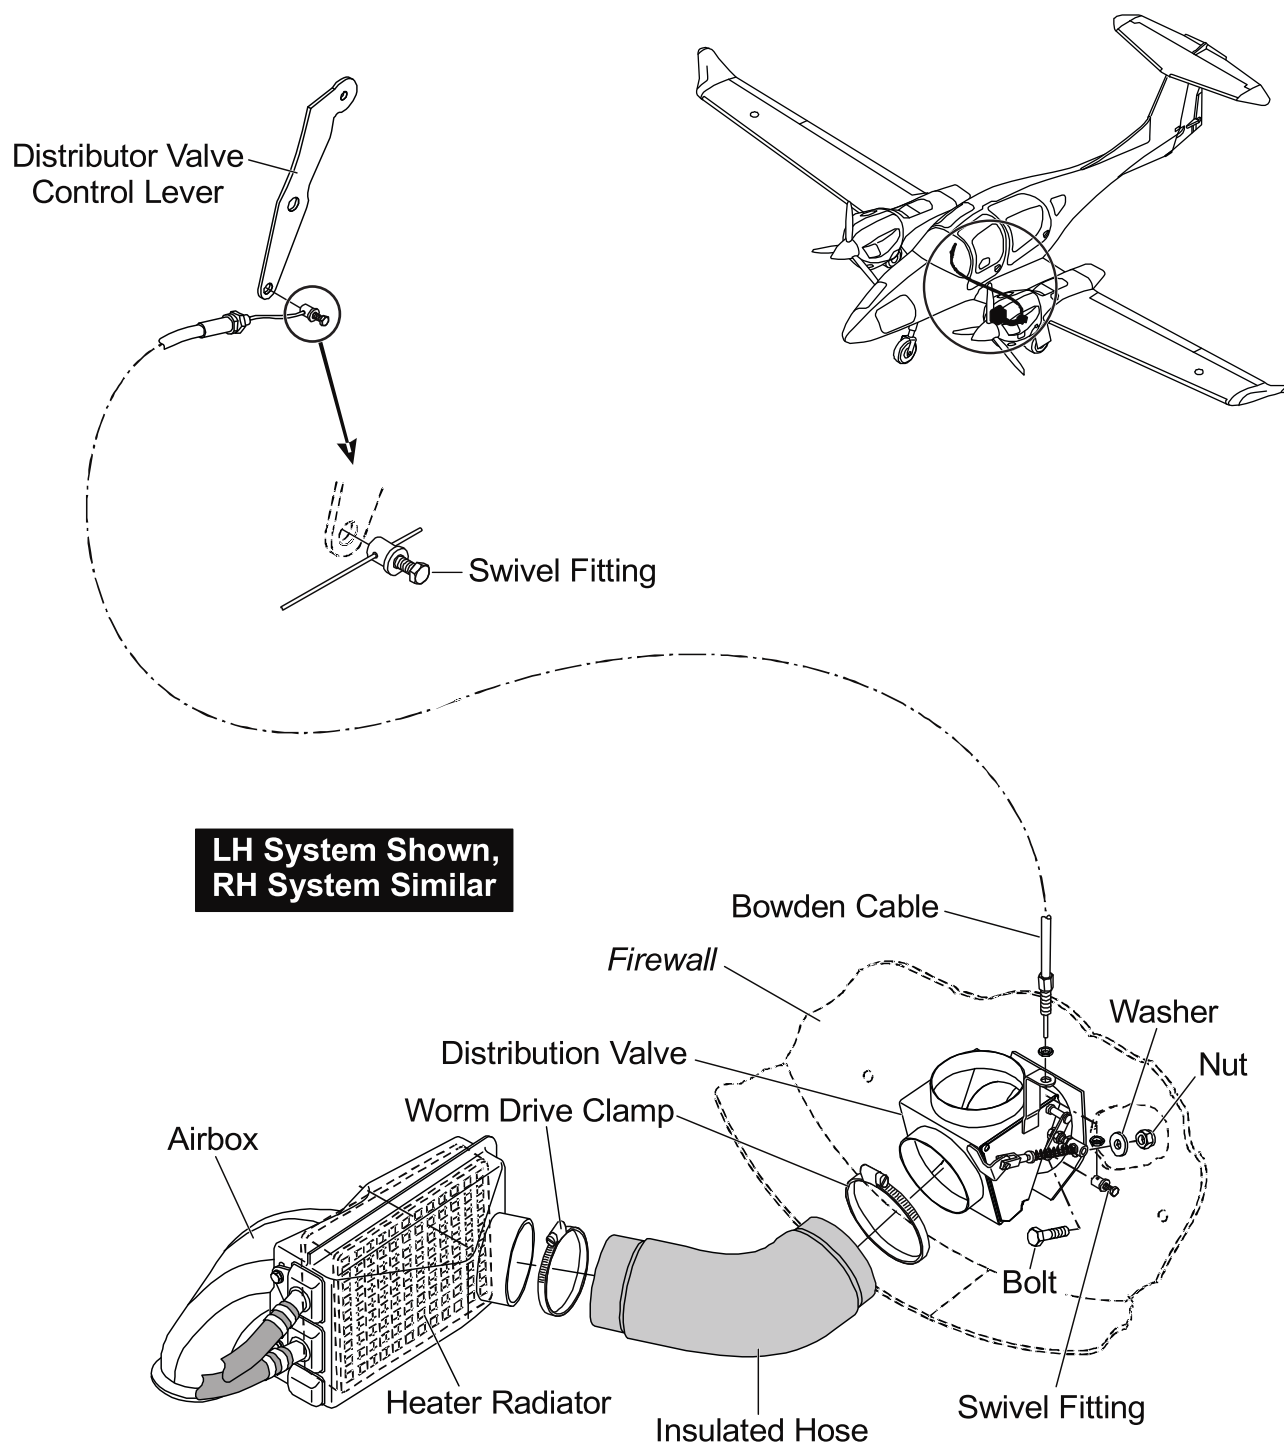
Heat Exchanger Installation - Sheet 2 of 3
